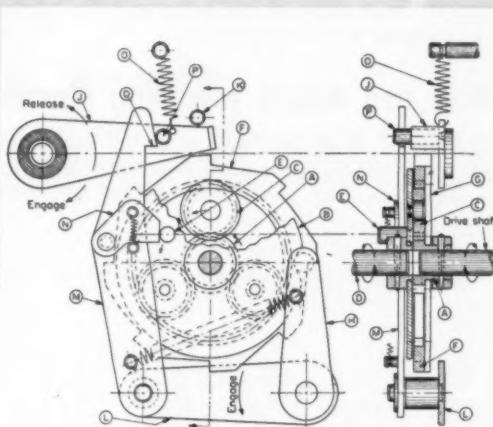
Planetary gear indexing clutch with gear reduction, single-cycle control mechanism and centralizer.
